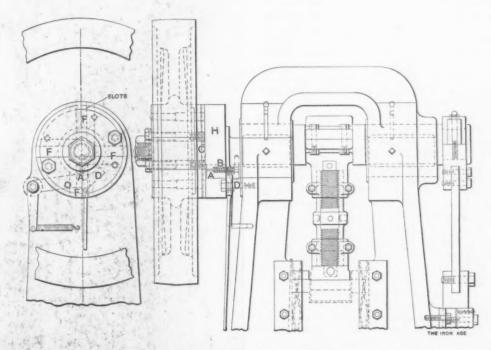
Detail of the Driving Mechanism of a Press Similar to the One Shown in Fig. 1, but Driven Directly Without a Gear Reduction.
